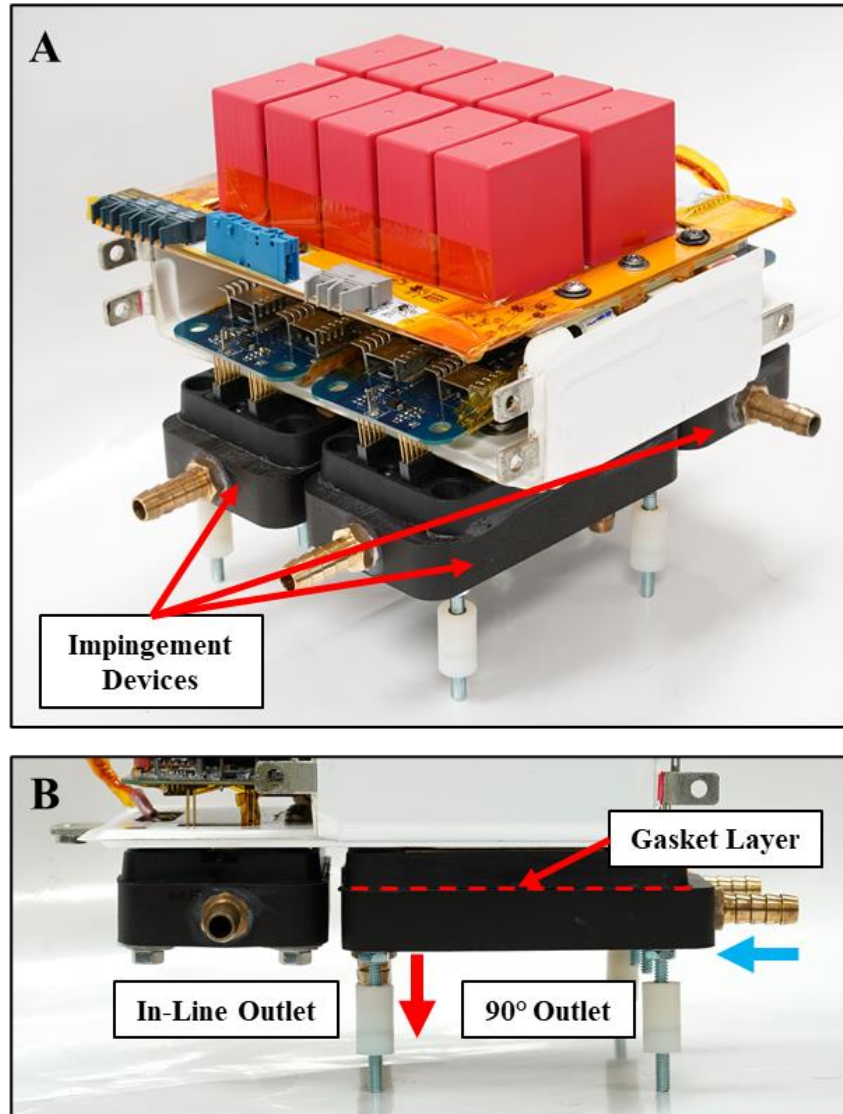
A) Inverter assembly with integrated impingement coolers. B) Description of outlet path modifications and gasket material locations.
